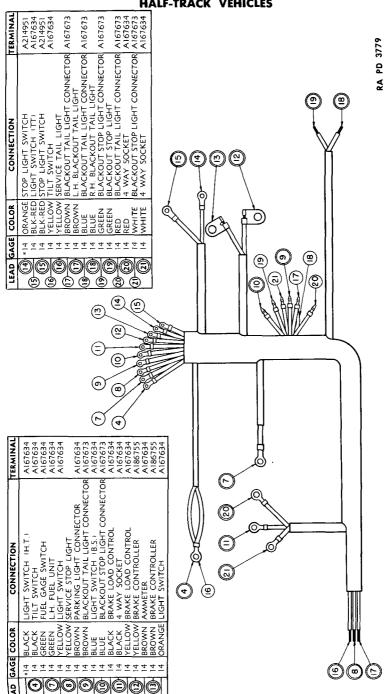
Wiring Harness Assembly (Rear Chassis, D48197)
